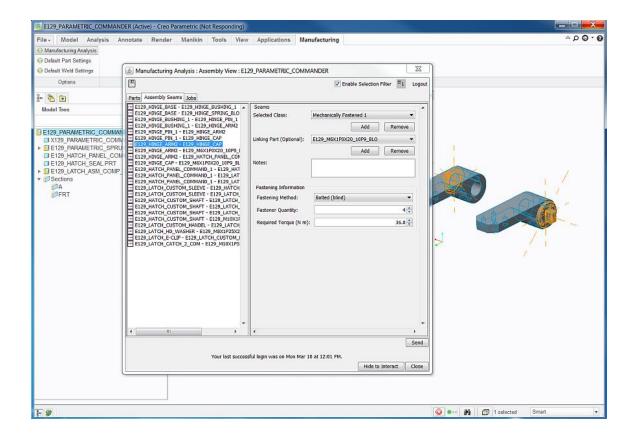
Adding assembly class specification (example shows Mechanically Fastened)
